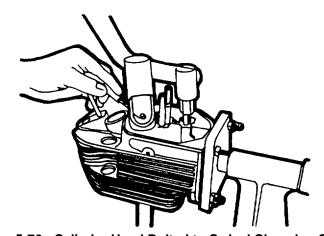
Cylinder Head Bolted to Swivel Clamping Stand
